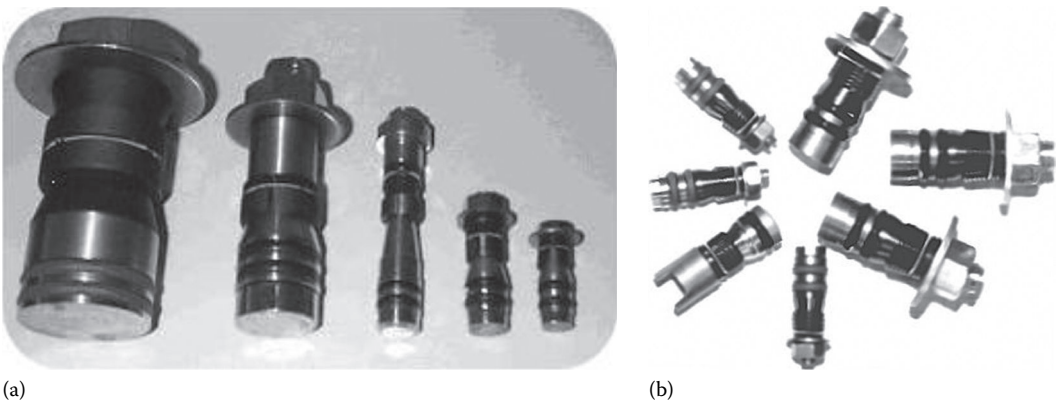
(a–b) Mechanical seal plugs. (Courtesy of Powerfect, Brick, NJ.)
